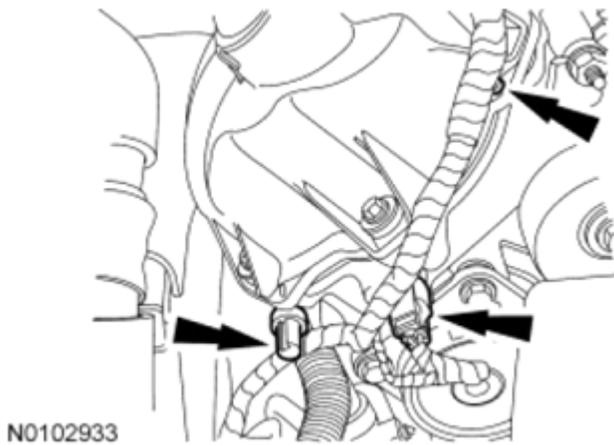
Connecting RH CMP Sensor Electrical Connector And Wiring Harness Retainers
